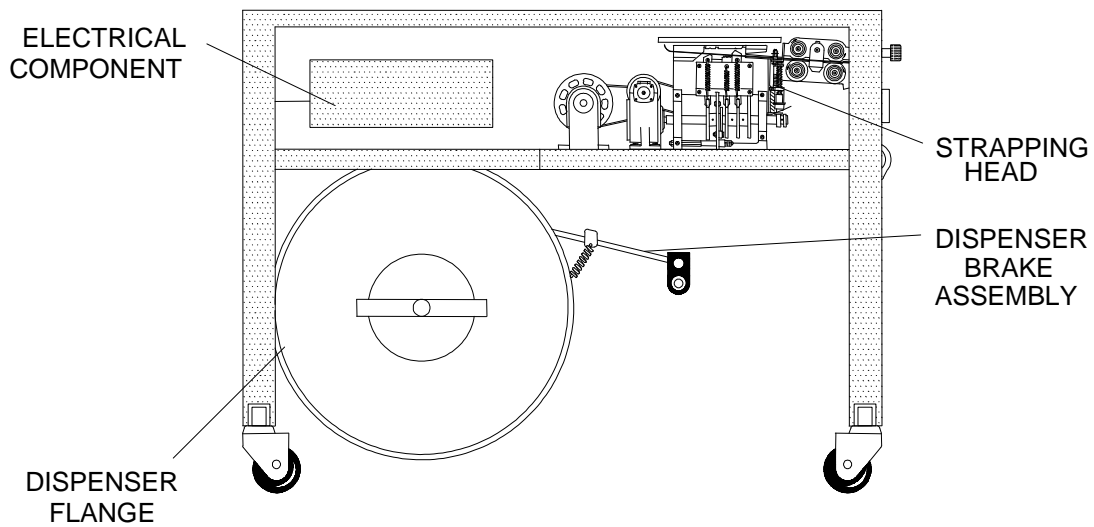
MAJOR COMPONENTS,FRONT VIEW
